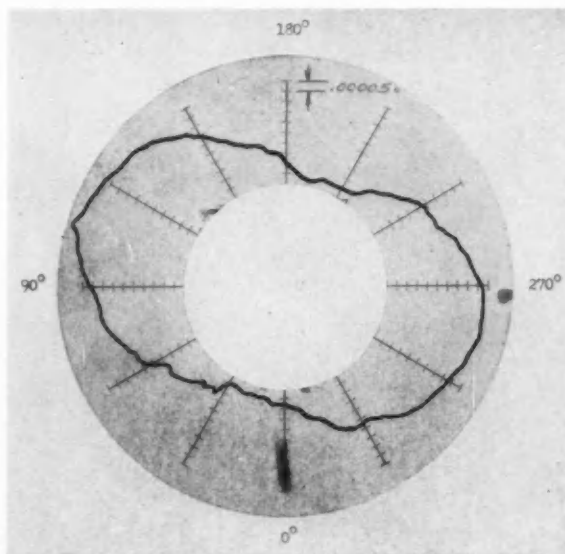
Talyrond trace of production shaft. A stiffening of seal lip material due to extreme cold or heat would cause seal failure on such an out-of-round shaft.
